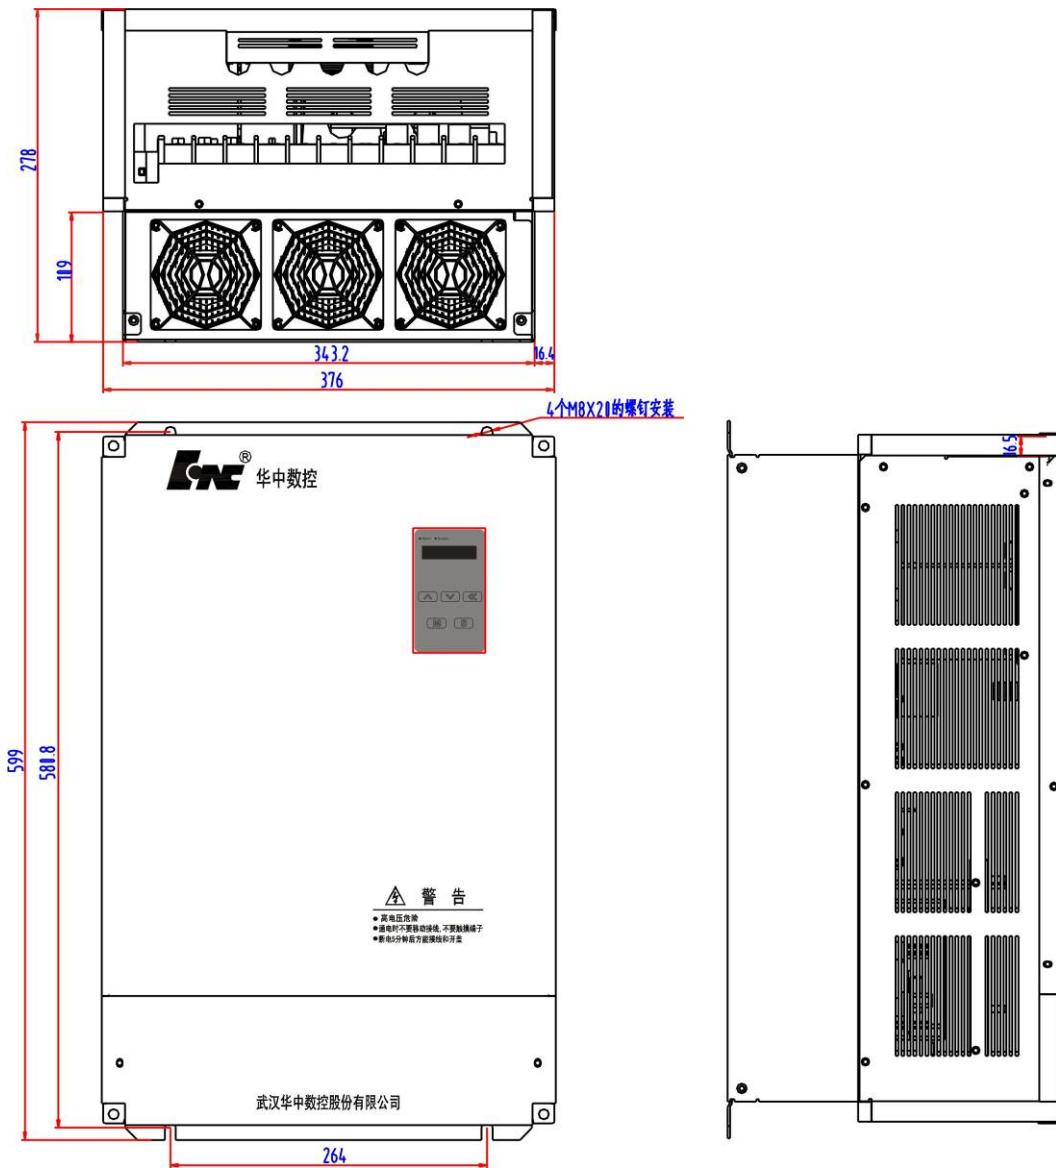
Dimension and size of HSV-180AS-, 200, 300, 450 (with auxiliary devices Unit: mm)
